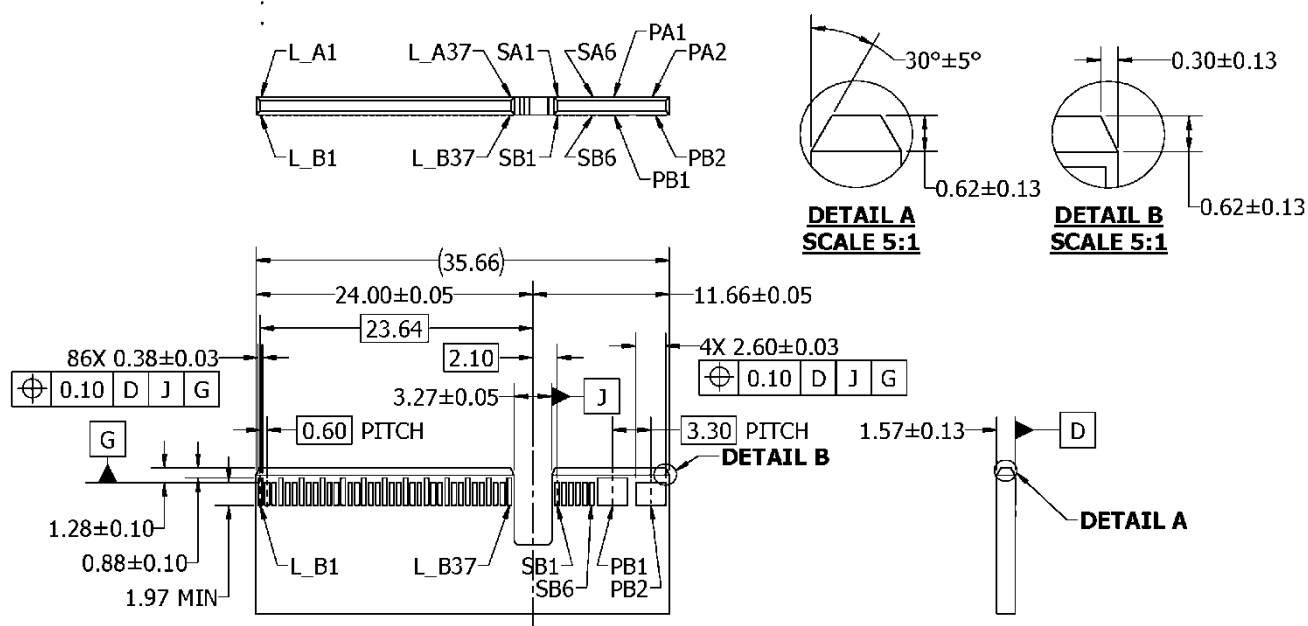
Plug Paddle Card for Combo x8+21A Power Plugs
